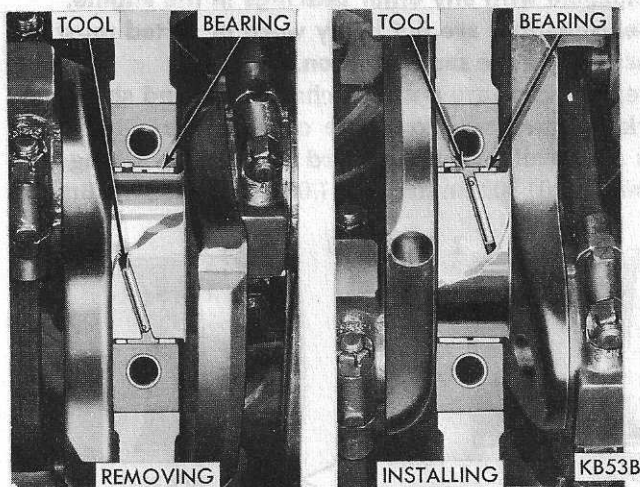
Removing and Installing Upper Main Bearing with Tool C-3059
